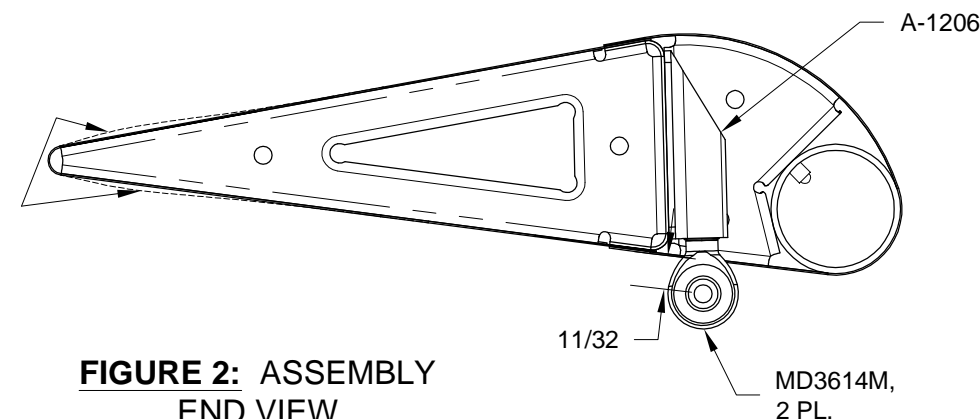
ASSEMBLY END VIEW (SOME PARTS NOT SHOWN FOR CLARITY)
